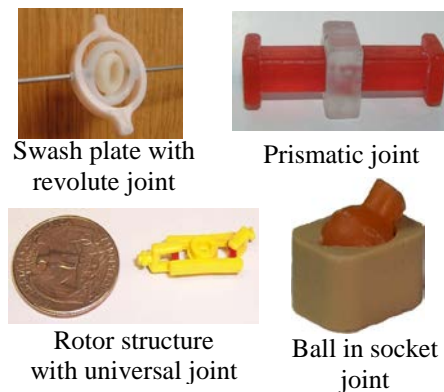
Joints developed at Advanced Manufacturing Lab using in-mold assembly (no post-molding assembly operation is required)
